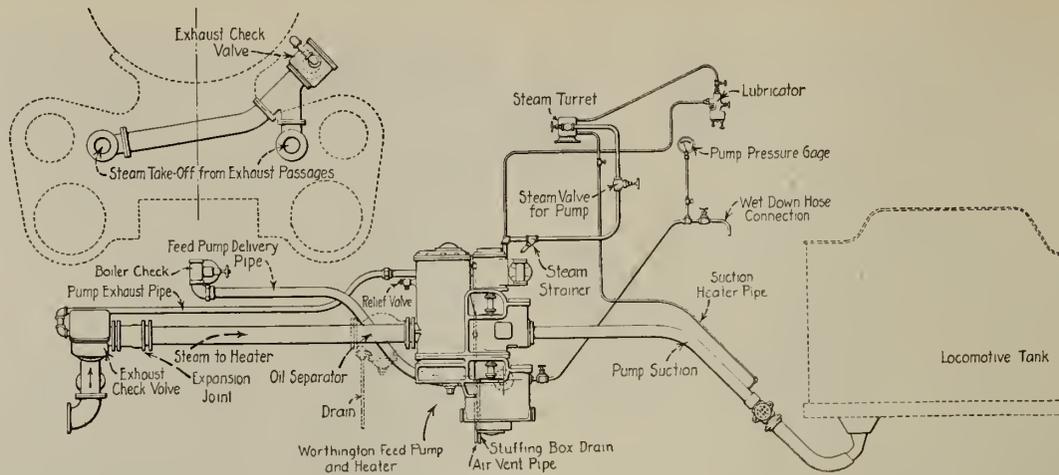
Piping Diagram showing General Layout of a Typical Application of Worthington Heater.
